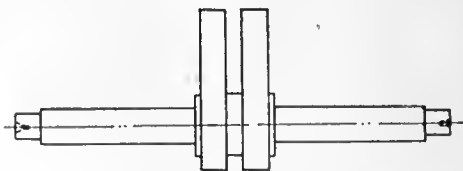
COMBINATION CASTINGS FOR MACHINING.
